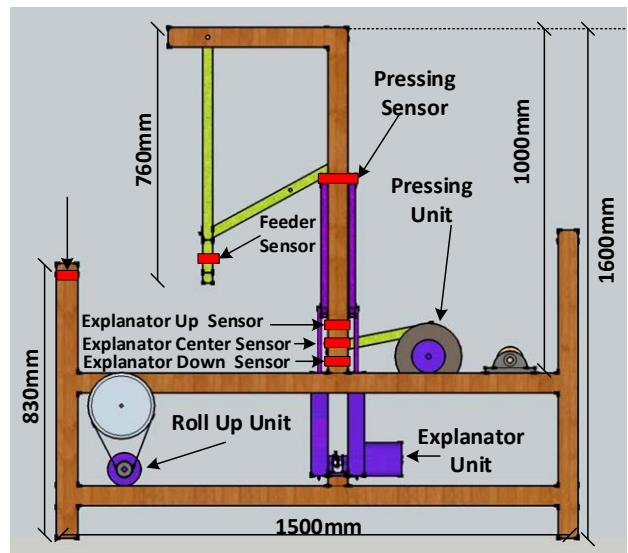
Mendong weaving machine design using sensor and primary unit.
